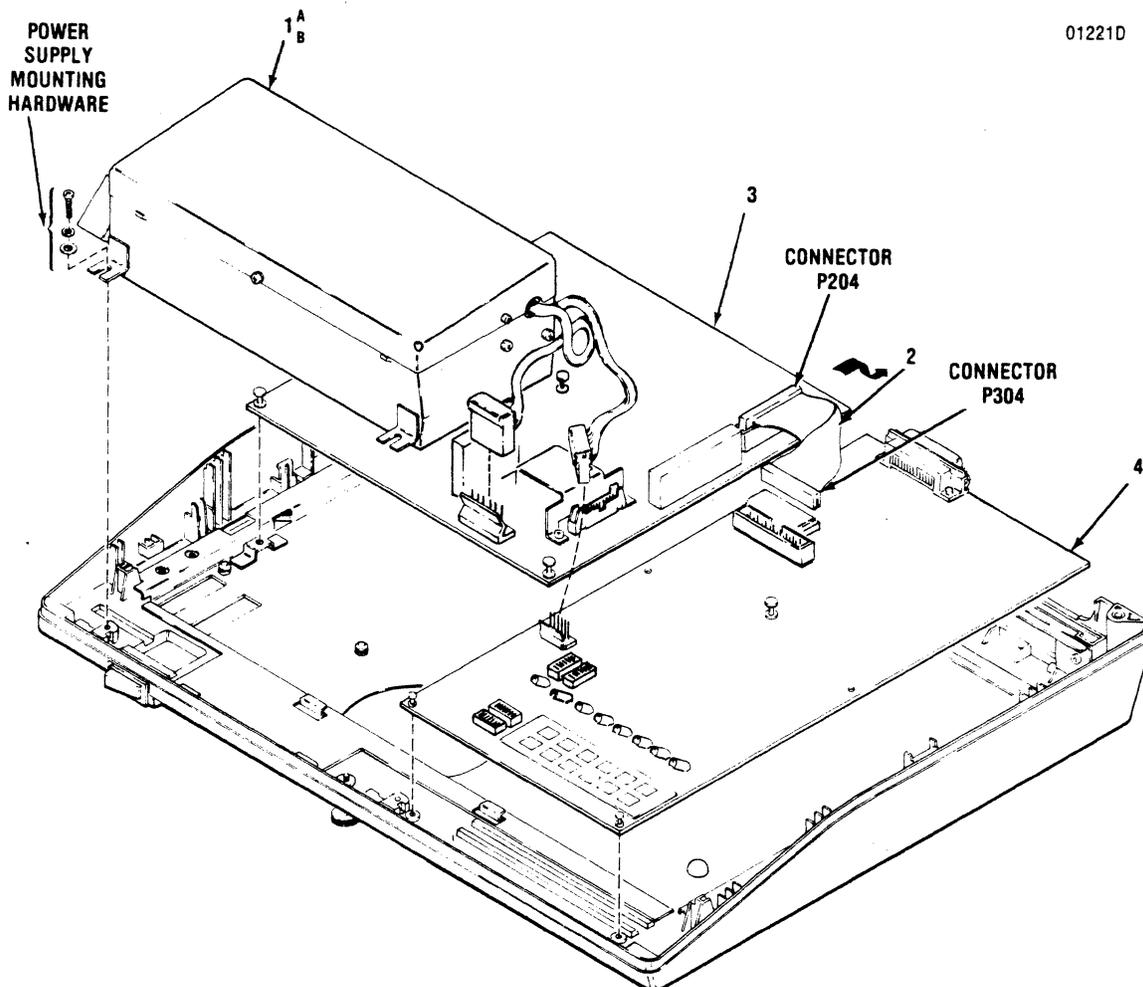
Removal/Replacement, Power Supply Assembly, CPU/Controller Cable, Print Controller PCB and CPU Board PCB
